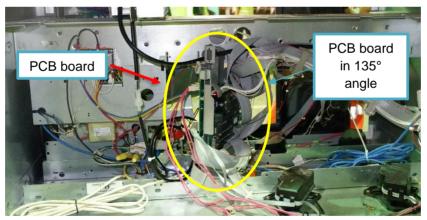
d – Turn the PCB board from 90° angle to 135° angle.
